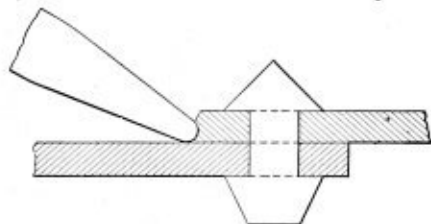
Position of Calking Tool When Plates are $\frac{1}{2}$ -Inch Thick and Over
